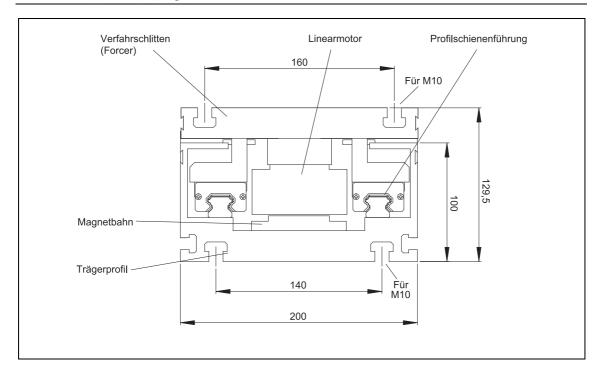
Groove fixing of the LMH1L-S2 linear motor axis
